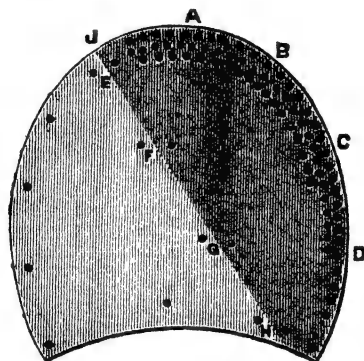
New Half Heel with Rivets to Resist Wear.
